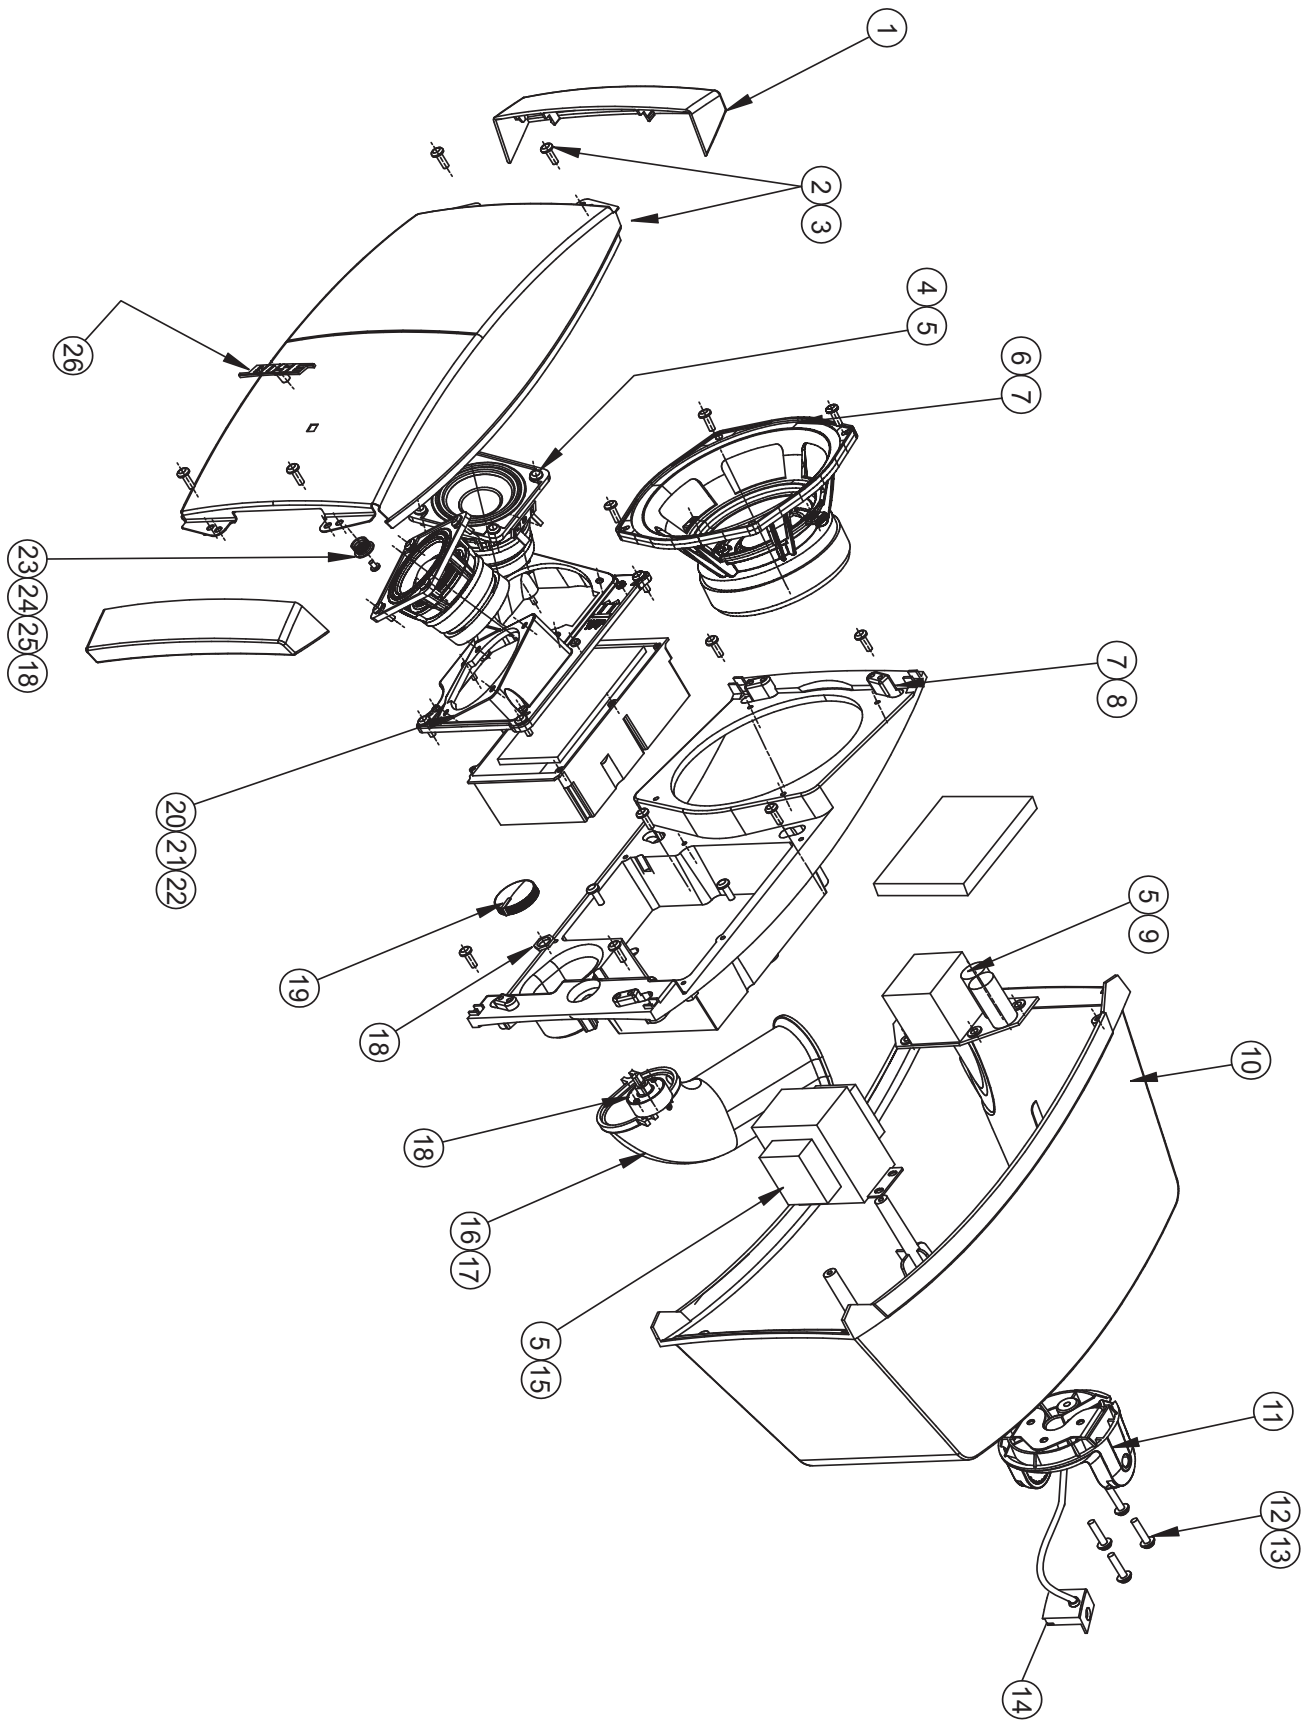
DS100 SE Wall-Mount Loudspeaker Exploded View
